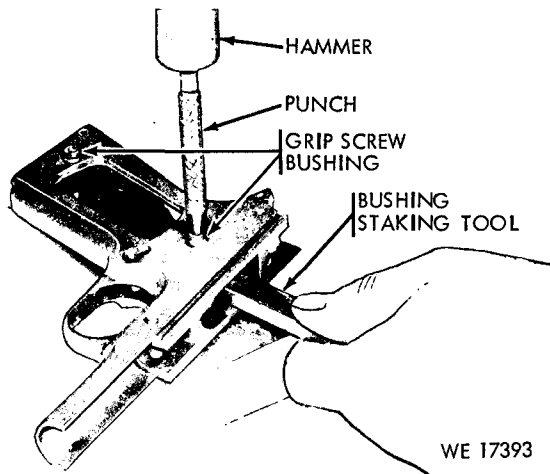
Installing and staking grip screw bushings on receiver, utilizing improvised tool for staking grip screw bushings.
